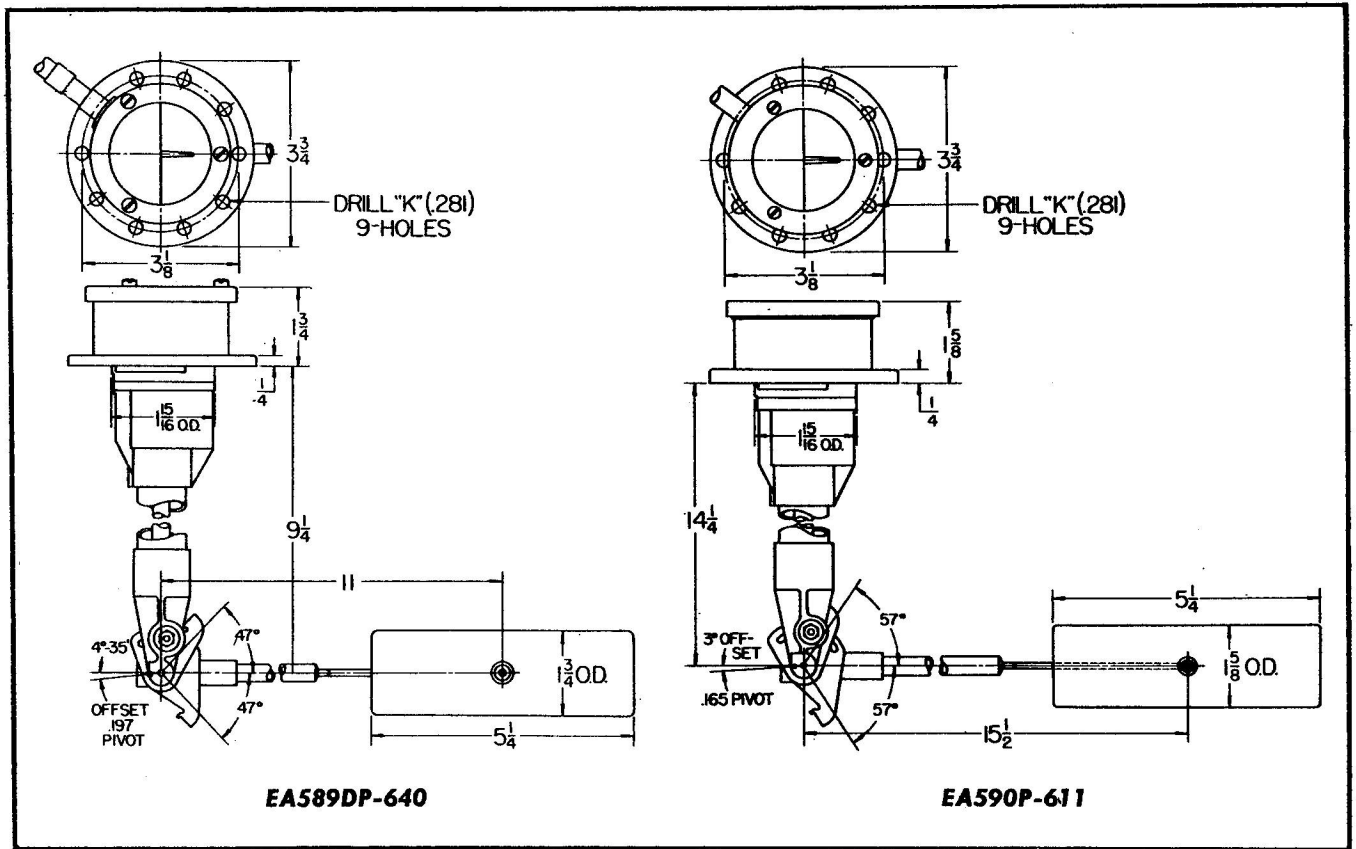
(Sheet 1 of 2 Sheets). General Dimensions
